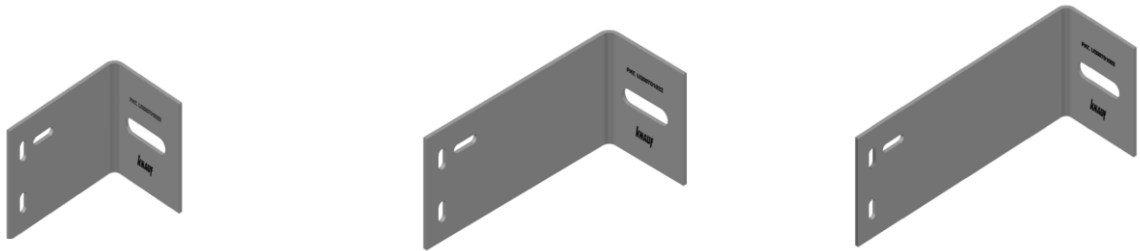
Galvanized steel retaining brackets for RBk-1 to RBk-3.
